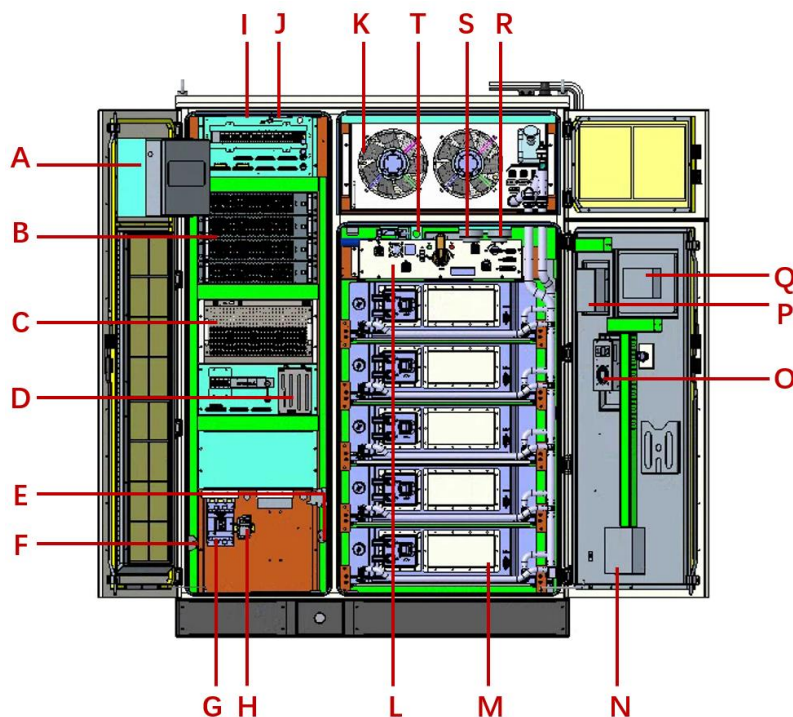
Components inside the cabinet of CESS233-100-01B
